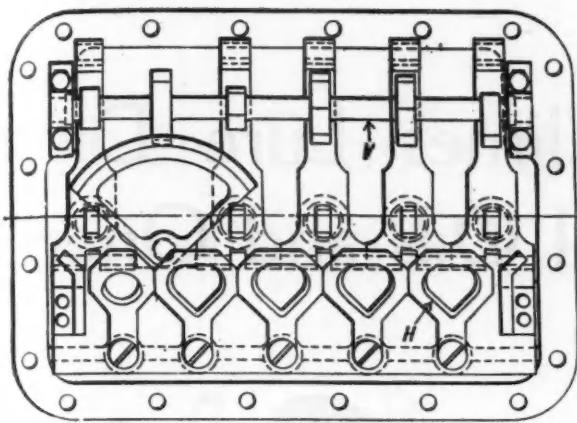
Cover plate of transmission box with camshaft and other parts of gear-changing mechanism
